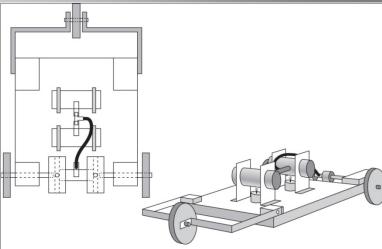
Concept VI of machine shop kit: Two metal tanks filled with water are heated with an alcohol burner. The heated water then generates steam that travels through a nylon tube to a steam tube. The steam tube is connected to two "steam wheels," which have holes drilled in them at 90° angles. The escaping steam will create rotation, which will turn the axles that turn the wheels and move the car.
